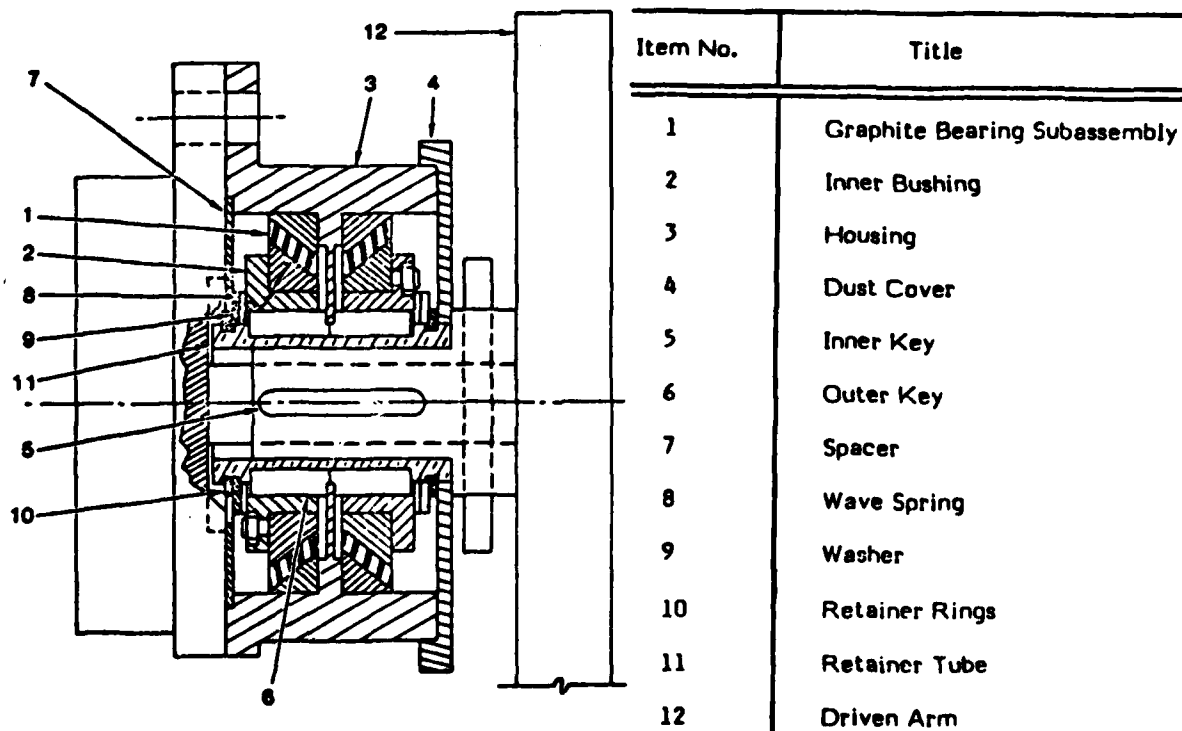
GOODYEAR AXLE COUPLER (ROTATING CONDUCTOR) ASSY
